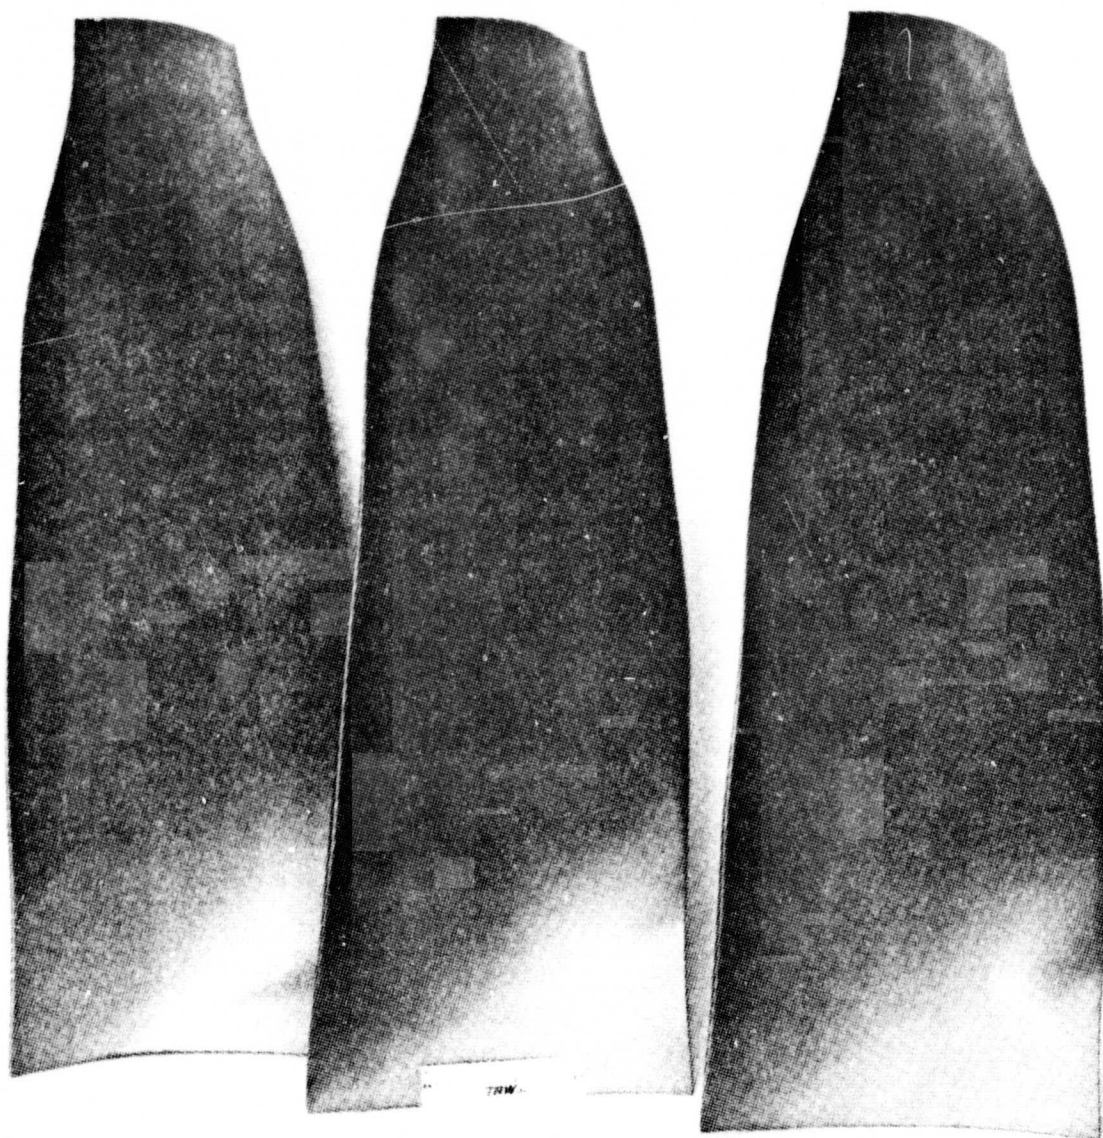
Blades 7, 8 and 9 After Finish Machining and Core Leaching.
